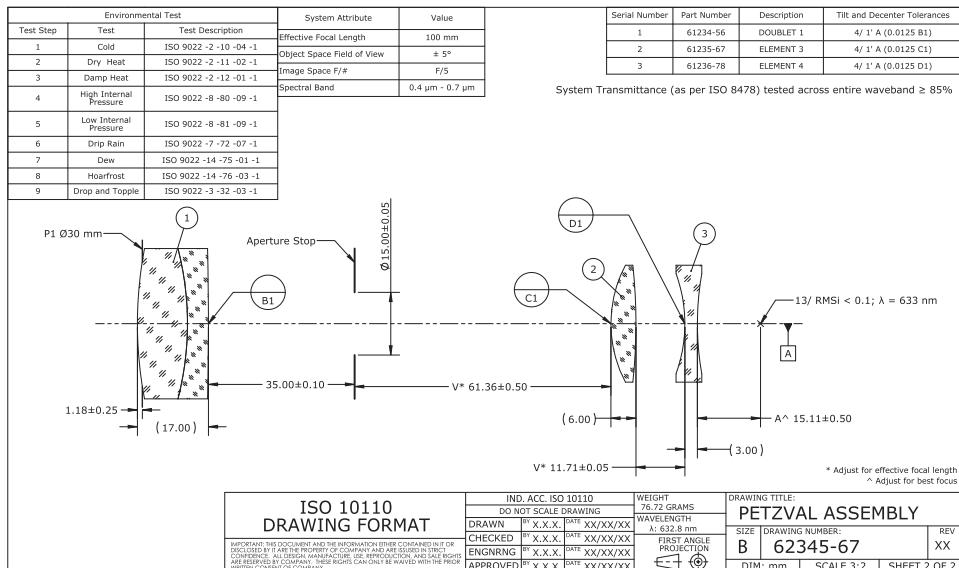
Optical system sample drawing for the entire optical assembly using the ISO 10110 drawing format.
